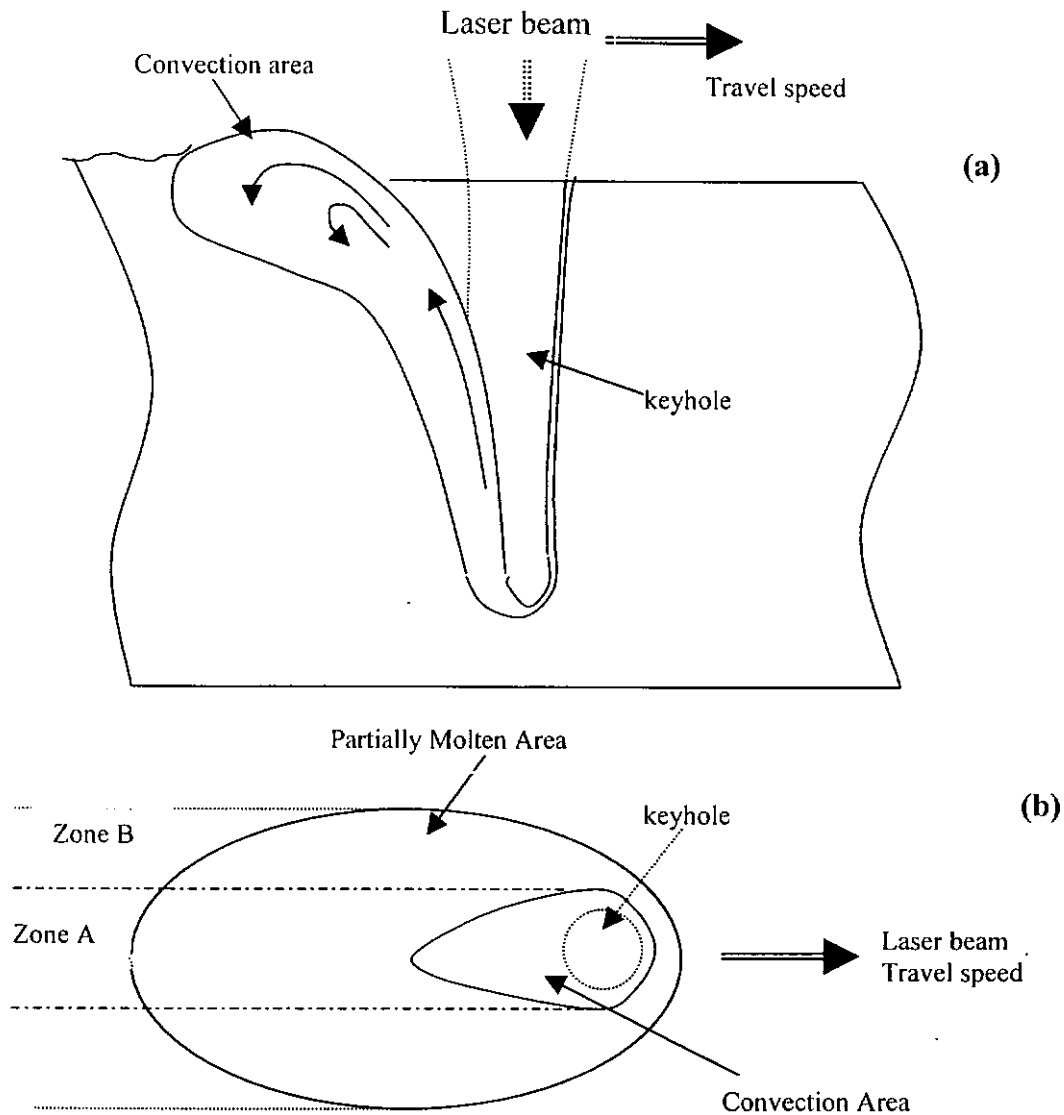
Keyhole laser welding of SiC/Al MMC. (a) cross section; (b) top view.
